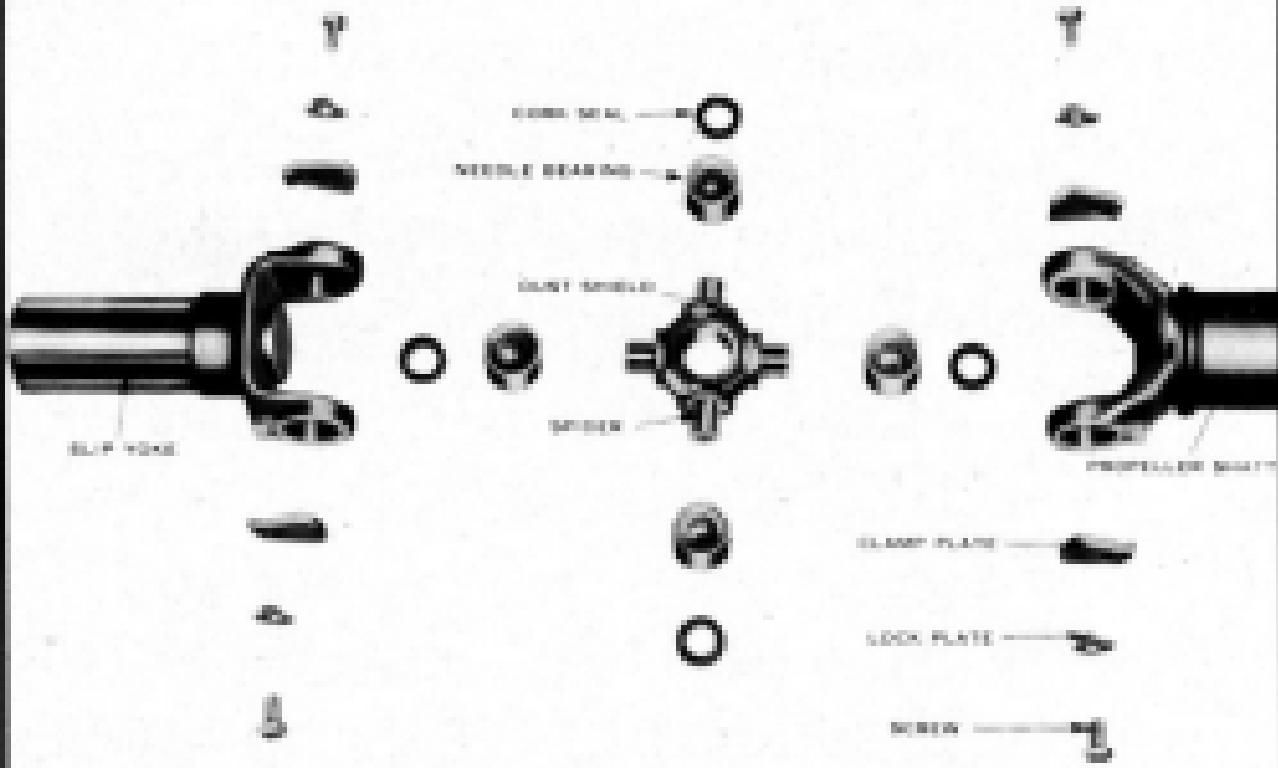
Universal Joint Details (Screw and Clamp Plate Type)
